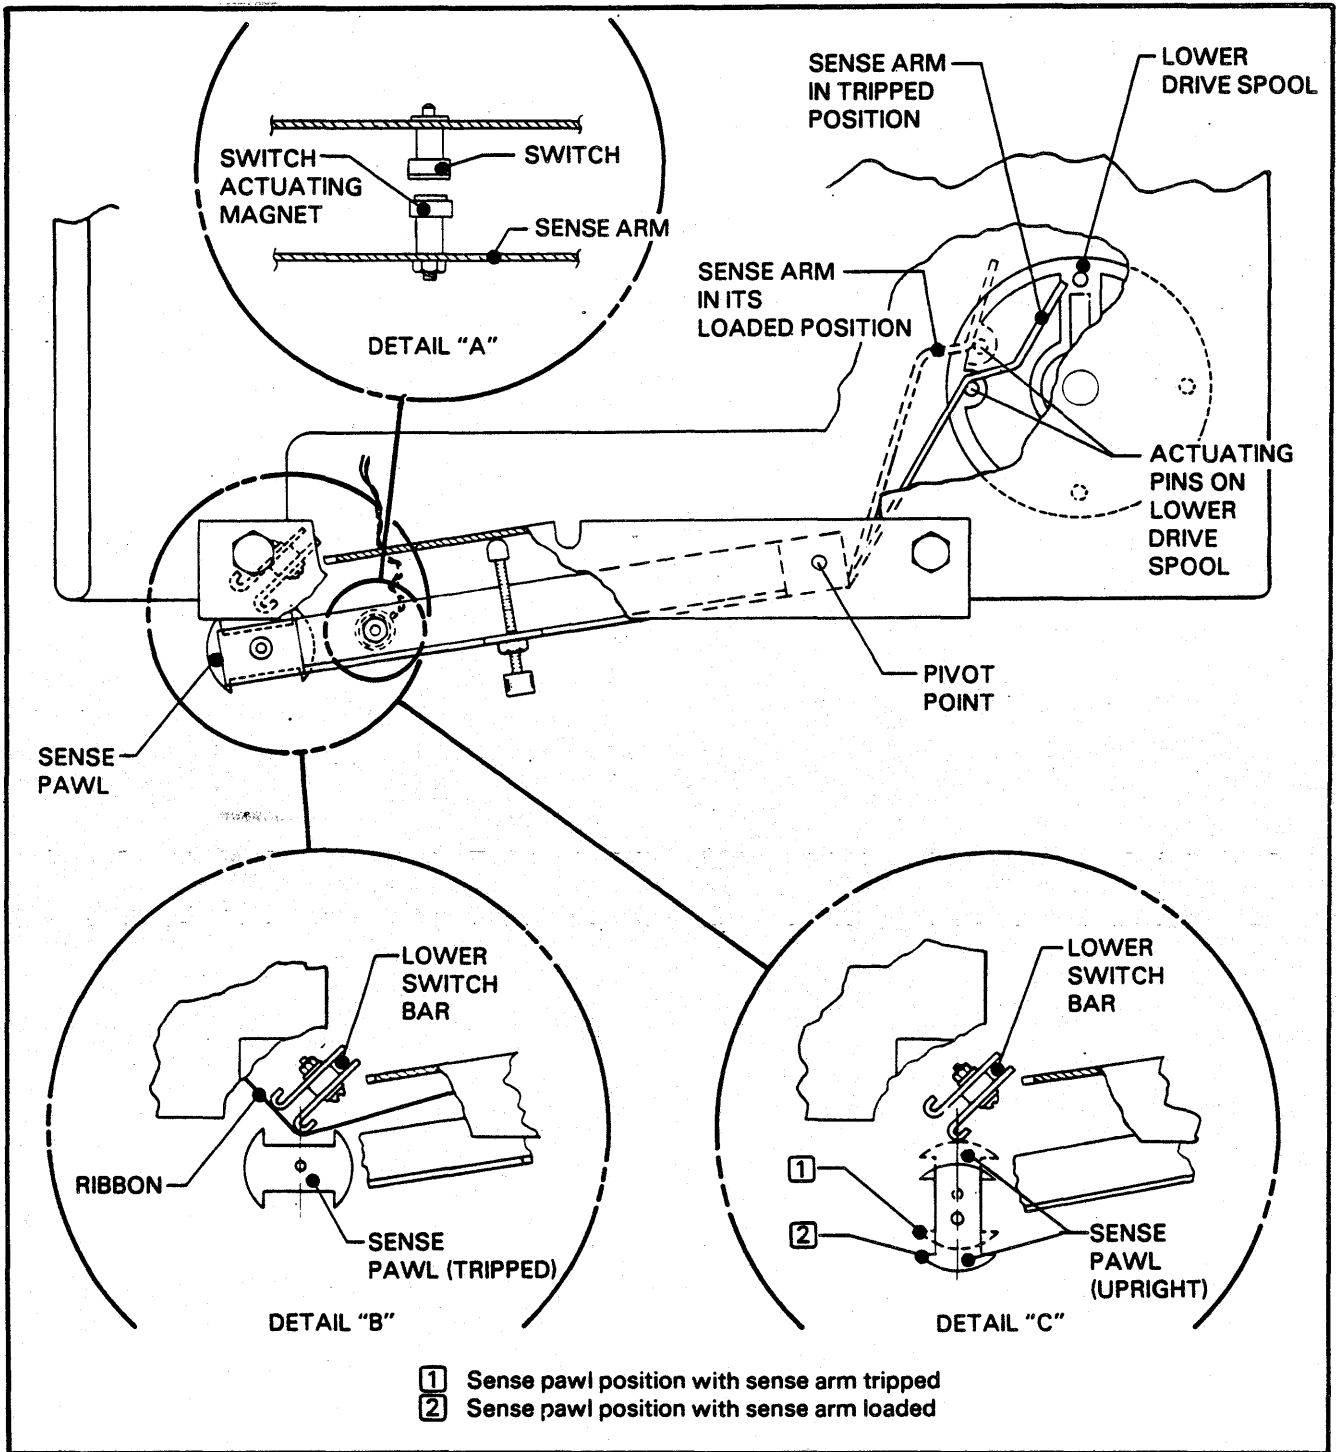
RIBBON SENSE PAWL ASSEMBLY
